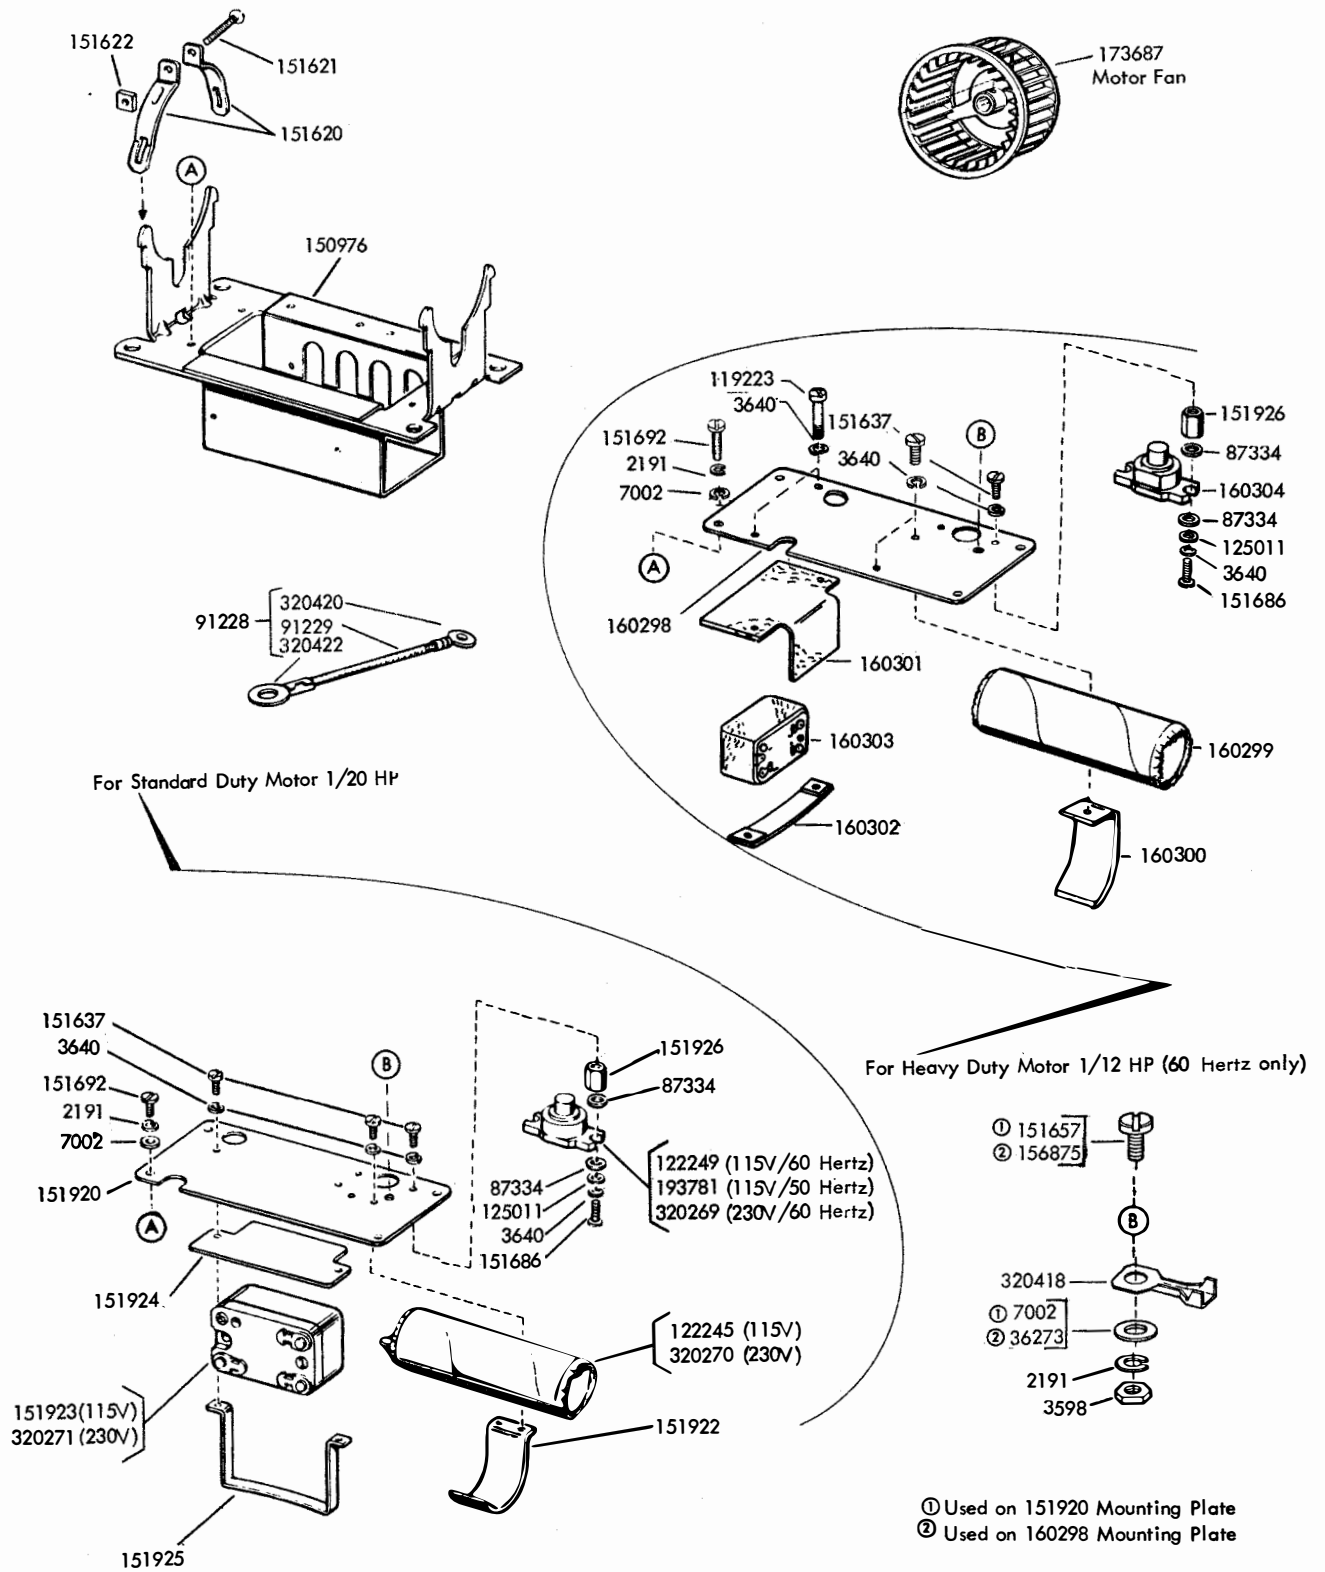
RELAY AND CAPACITOR MOUNTING (SYNCHRONOUS)
